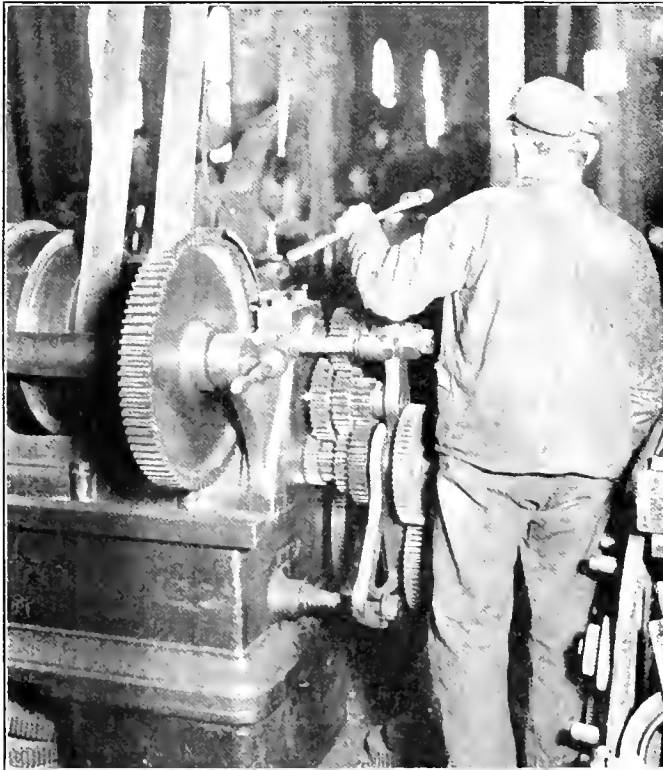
Exposed Lathe Gears Liable to Cause an Accident.
